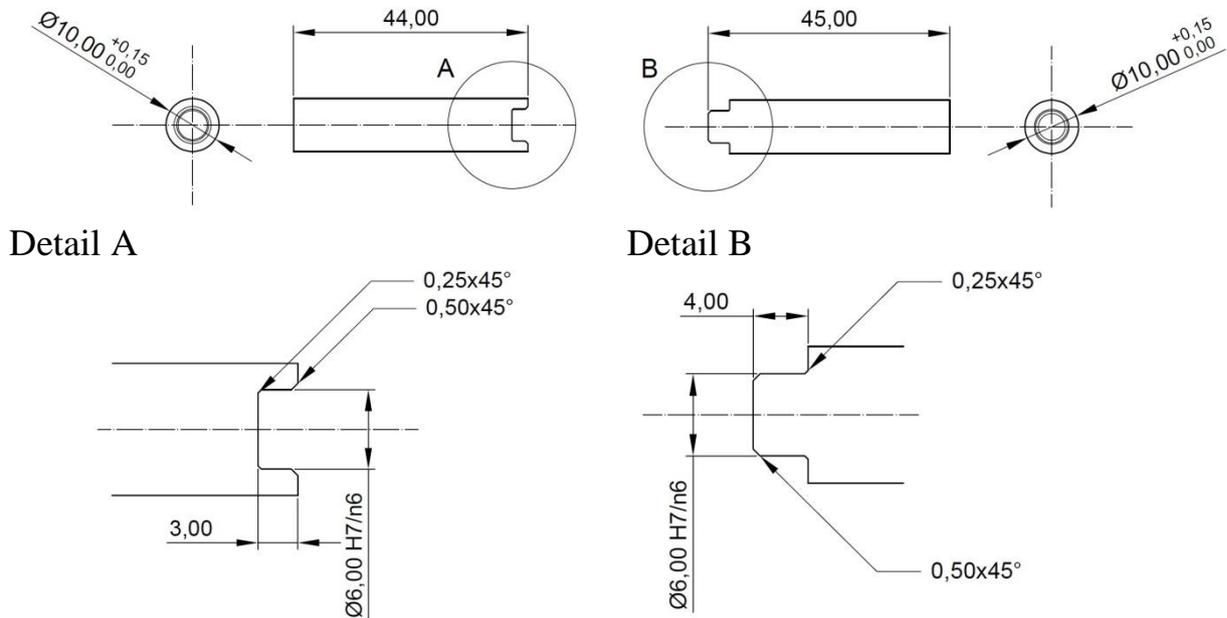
Shapes and dimensions of the specimen used to physically simulate the welding process during plastic strain
